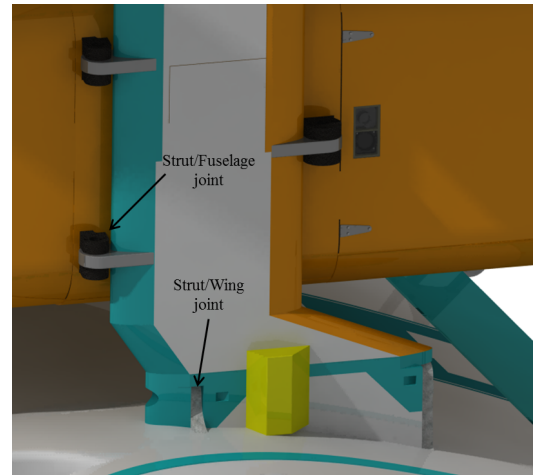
Structural connections between wing, fuselage, and strut.
